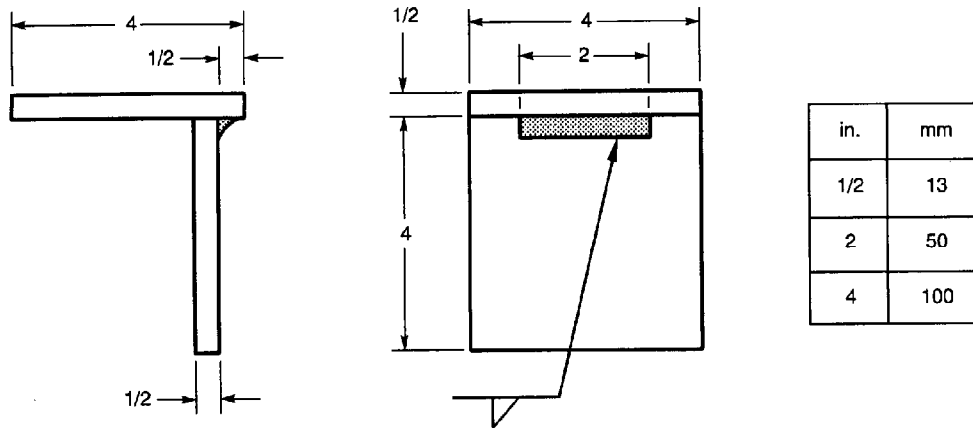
Fillet Weld Break Specimen—Tack Welder Qualification (see 4.19.2)
